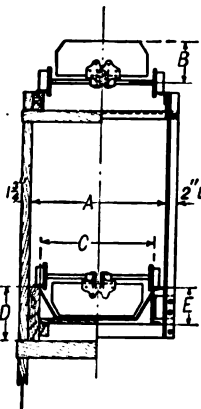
SINGLE STRAND FLIGHT CONVEYOR. (SUSPENDED FLIGHTS WITH ROLLERS.—TABLE 6.)
